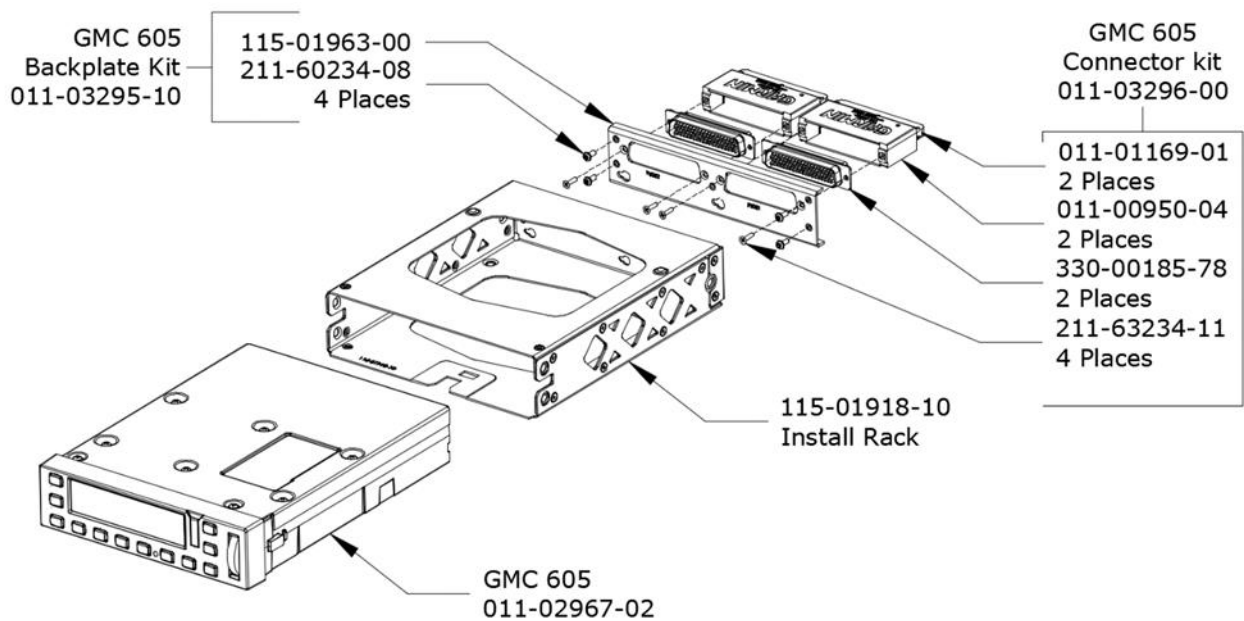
GMC 605 Installation and rack/backplate assembly
